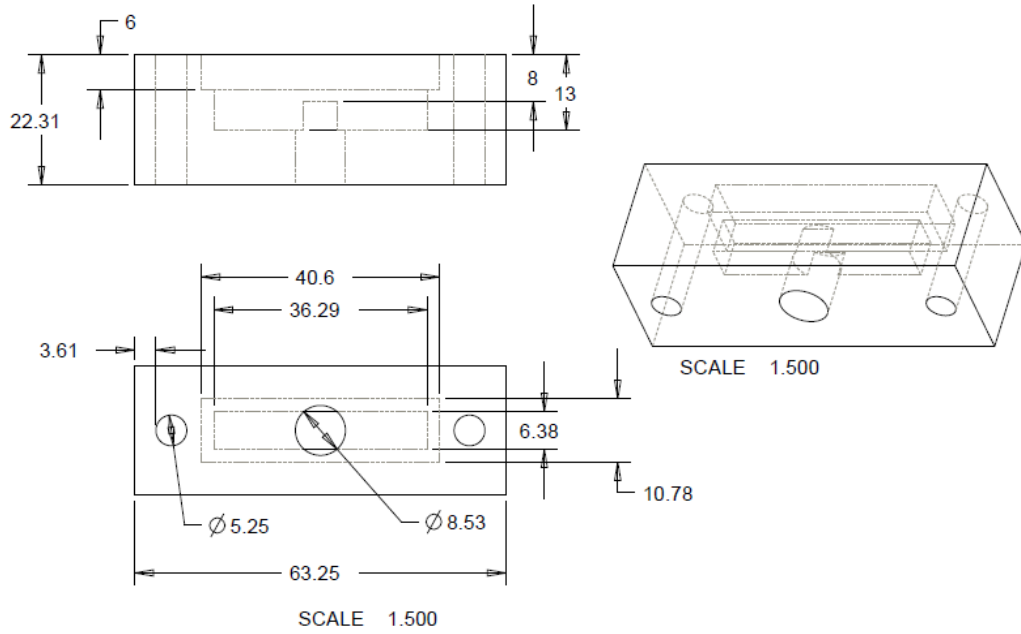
Engineering drawings of the header. All dimensions are in millimeters.
